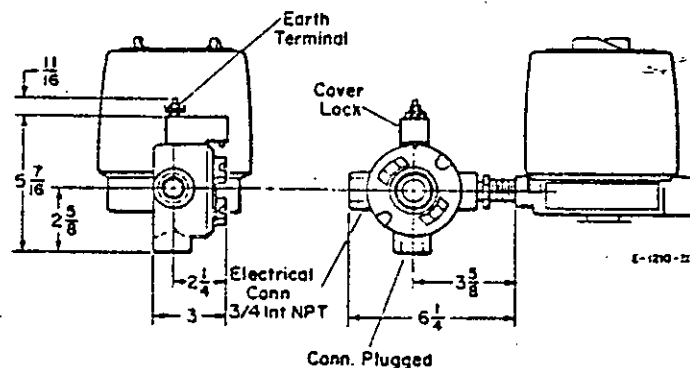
A. Mounting Dimensions for European Flameproof Electrical Connection
